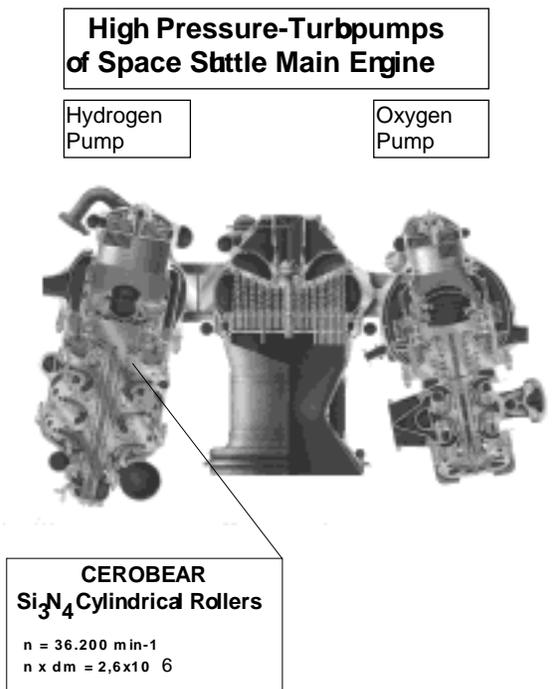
CEROBear Cylindrical rollers in turbo pump of space shuttle main engine. (United Technologies Pratt & Whitney, West Palm Beach, FL, U.S.A.)
